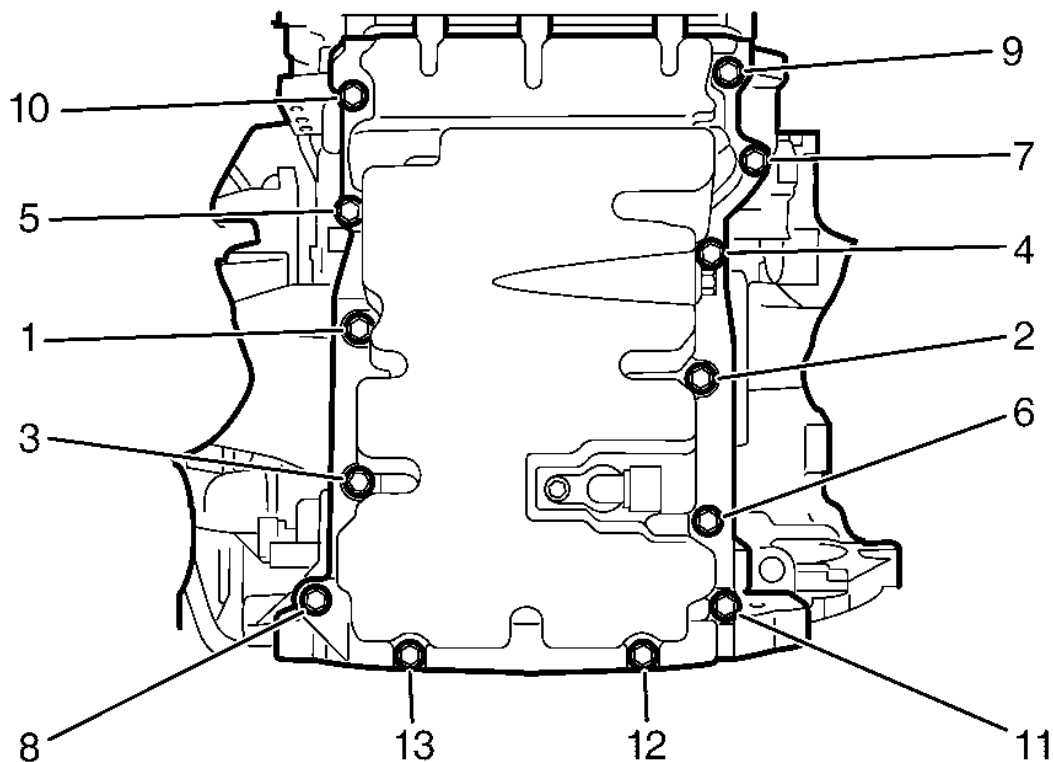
View Of Oil Pan & Cylinder Block
